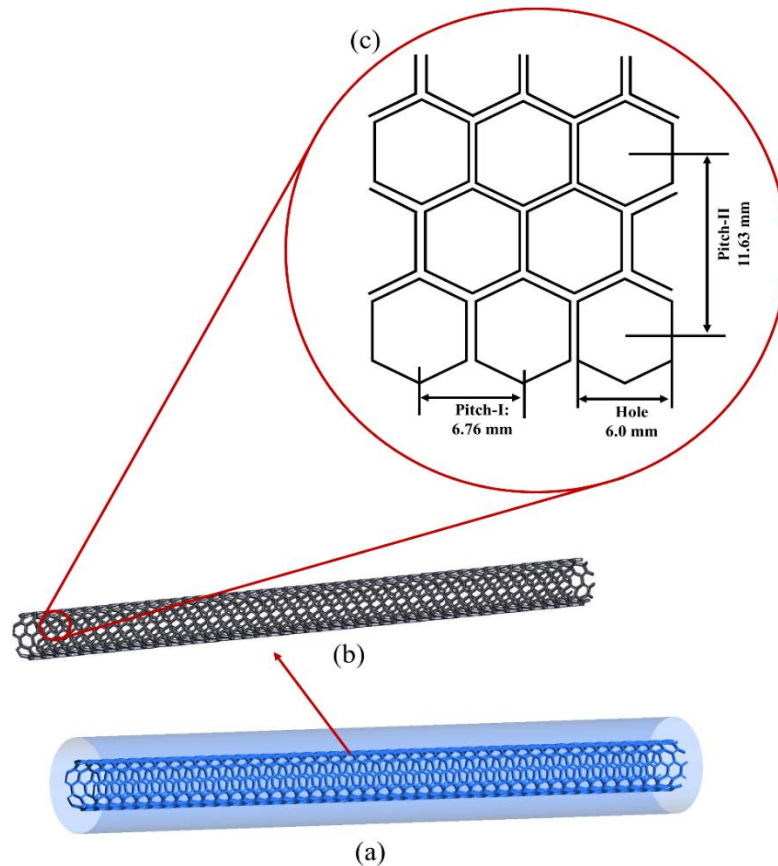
(a) Schematic design of the physical model, (b) Configuration of hexagonal perforated tube insert, (c) Enlarged view of the tube insert with physical dimensions.
